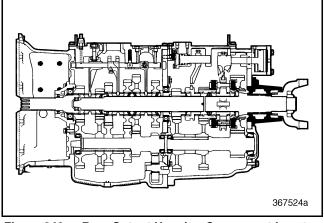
Rear Output Housing Component Locator (T313L21/T318L21 Shown)
